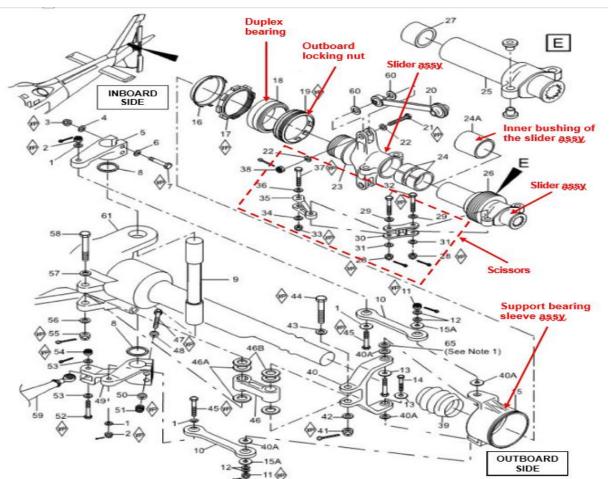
Exploded view drawing of the tail rotor rotating controls, with indication of the relevant parts for the investigation.
